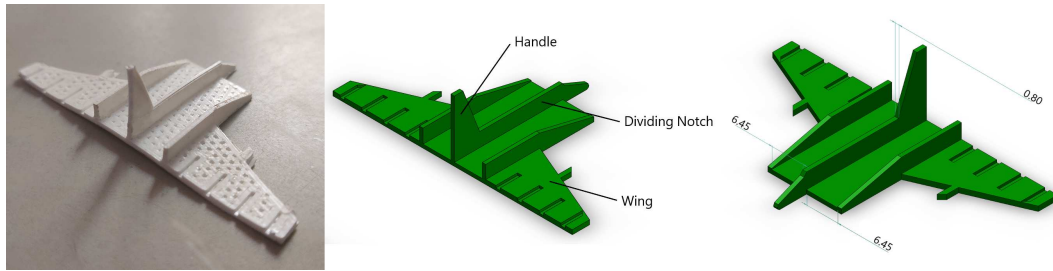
Assistance tool along with diagrams of its basic parts and dimensions (mm). This tool is used for mounting the perforated regions of the adjacent copper tapes onto the ETPU block while also protecting the user from the heated bed. The core functionality is to ensure 0.8 mm gap between these tapes. Markers on the wing are used as reference to orient the tool with respect to the polymer matrix.
